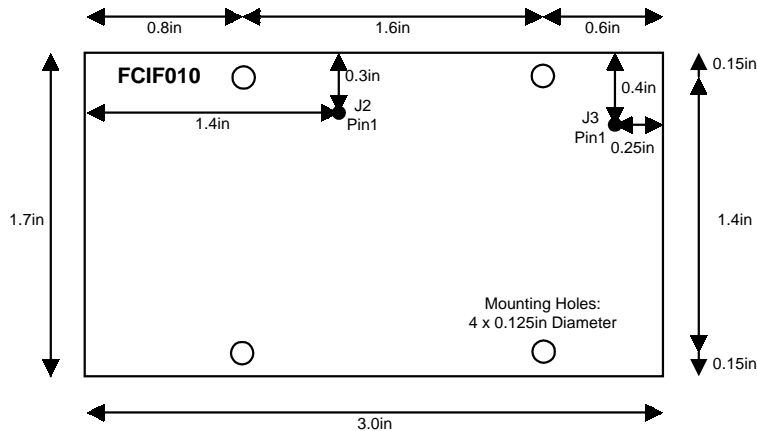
FlexBus™ Board Dimensions with Mounting Holes and Connector Pins
